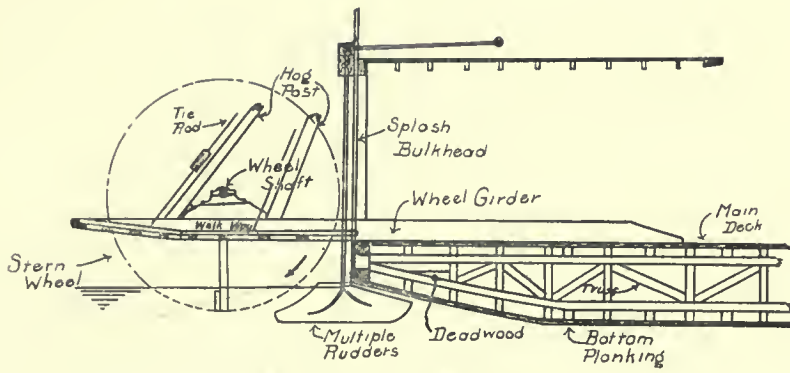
SHALLOW DRAFT STERN WITH STERN WHEEL
